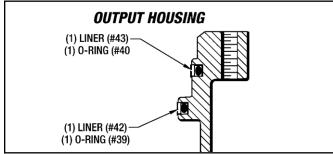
Installing Piston Seals in Output Housing (#9)
